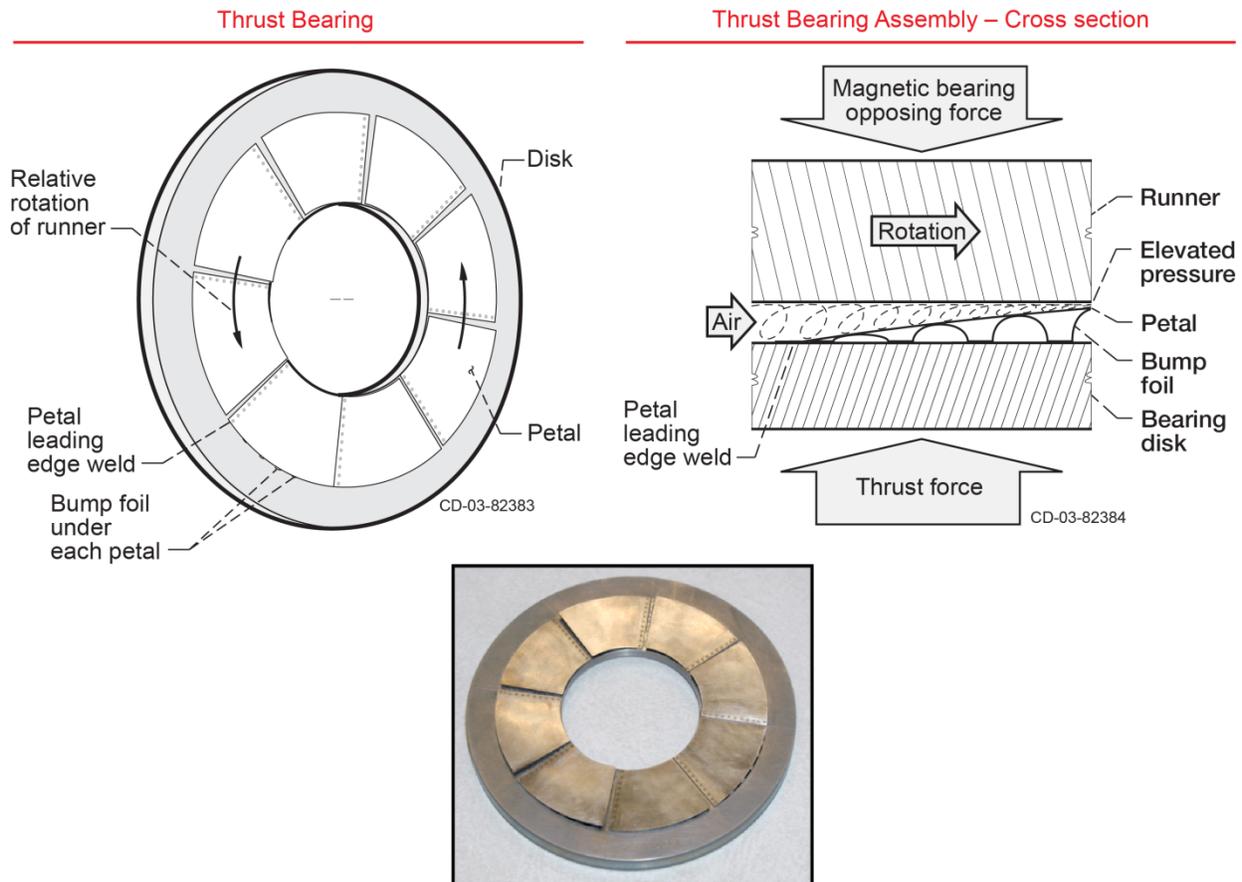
Drawing and photograph of a simple foil thrust bearing.
